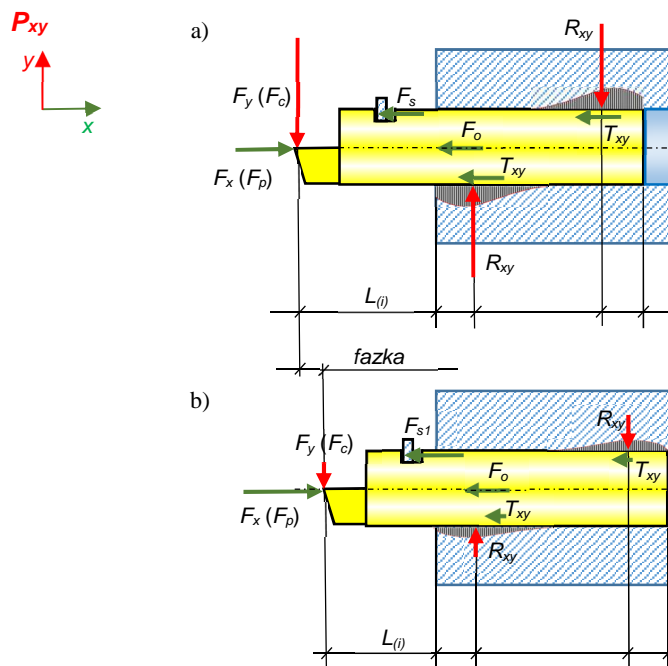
Cassette of self-bevelling tool with flat spring, installed inside of the classic cutting tool
